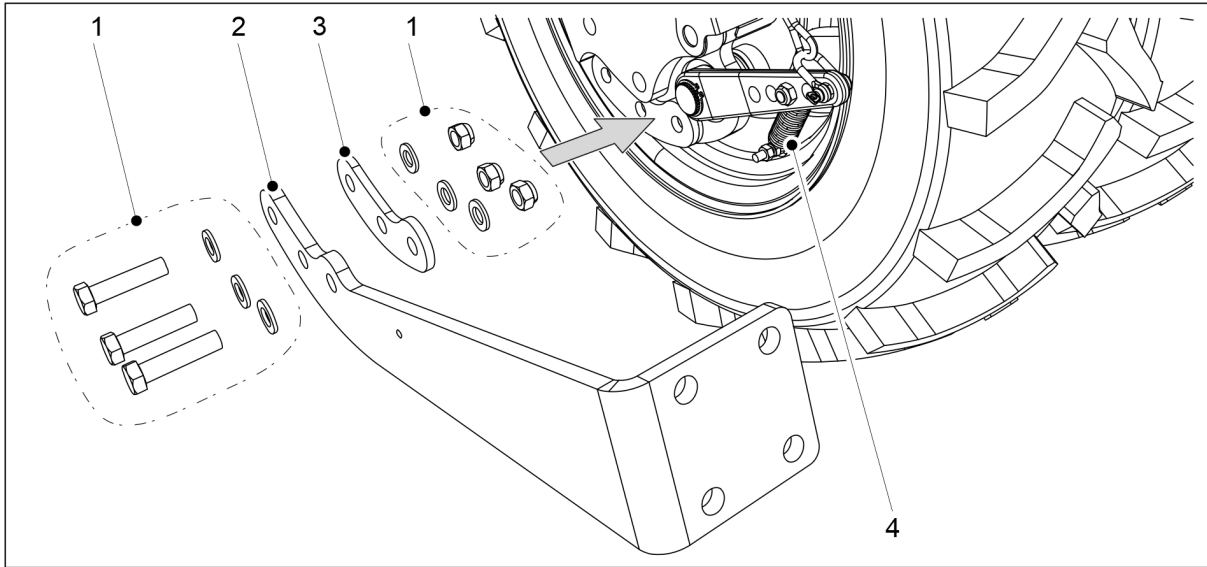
62. Mounting the scraper to the attachment bracket
